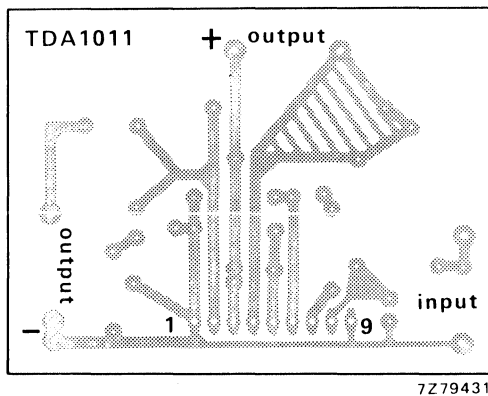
Track side of printed-circuit board used for the circuit of Fig. 4; p.c. board dimensions 62 mm x 48 mm.
